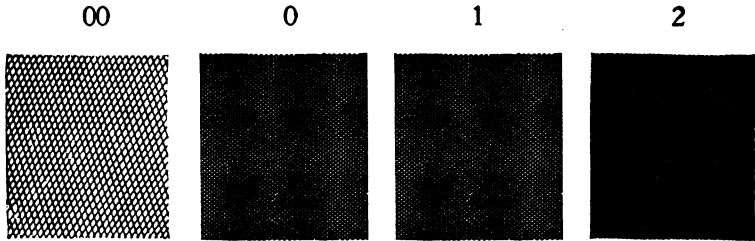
Nos. 00-0-1- and 2 cuts for machine files (exact size of cut)
